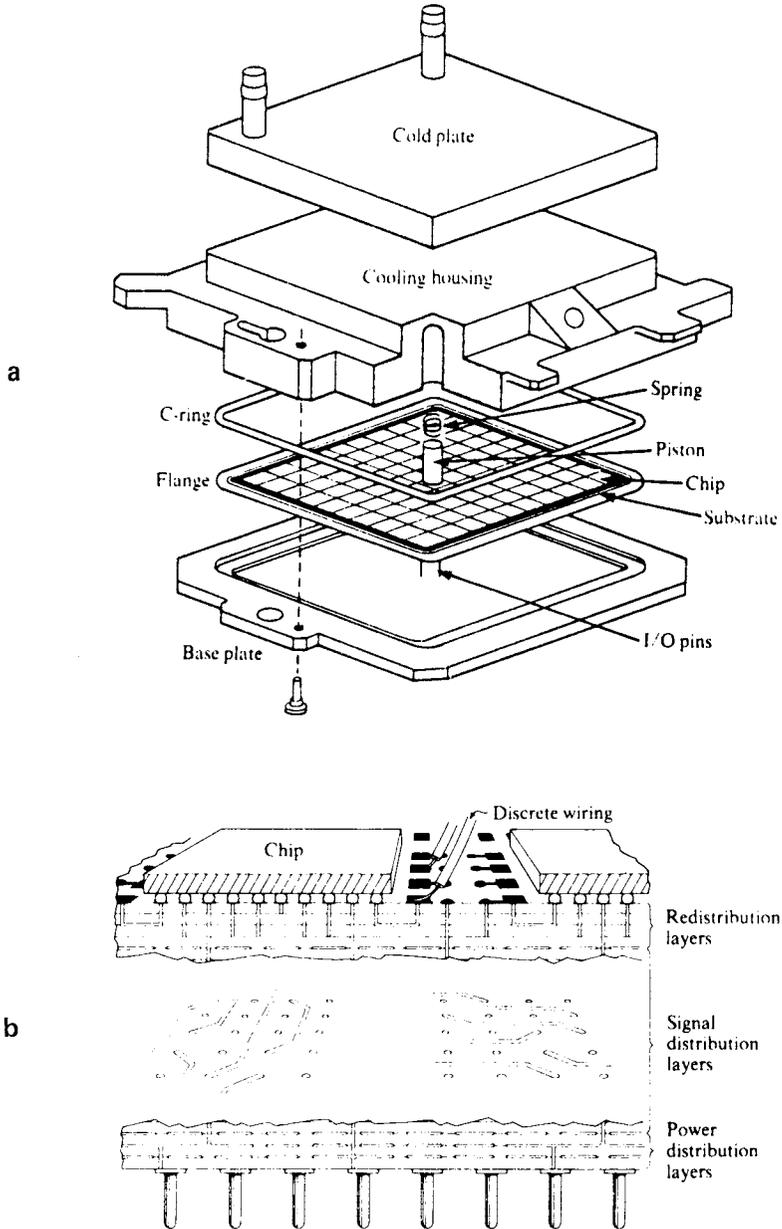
(a) Exploded view of the thermal conduction module assembly. (b) Schematic drawing showing the wiring structure of the multilayer ceramic substrate used in the thermal conduction module (Reference 14).
